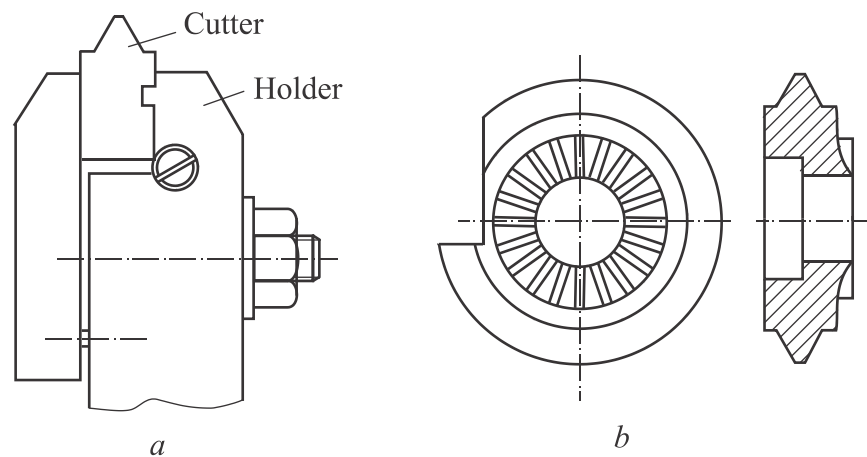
Form thread cutters: (a) prismatic; (b) circular
